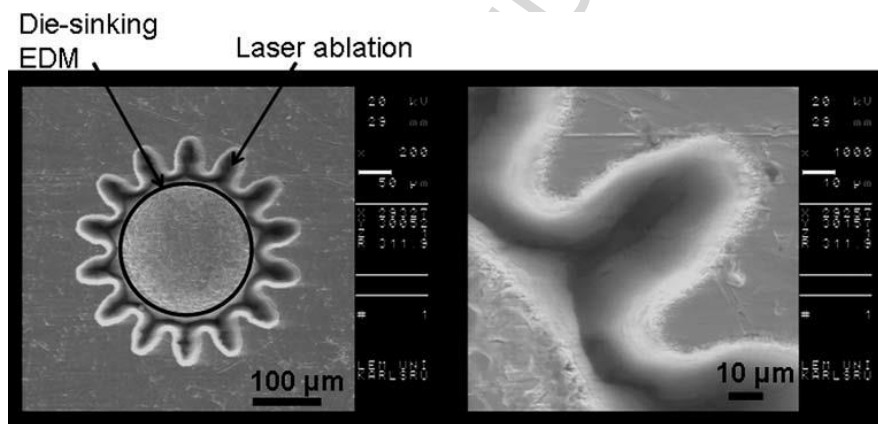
Hardened steel gear wheel machined by micro-EDM and laser ablation [17]
